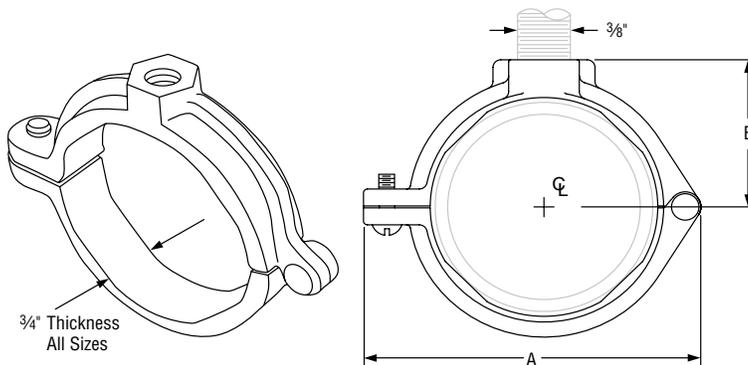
R: LOADS (LBS) • WEIGHT (LBS) • DIMENSIONS (IN)
